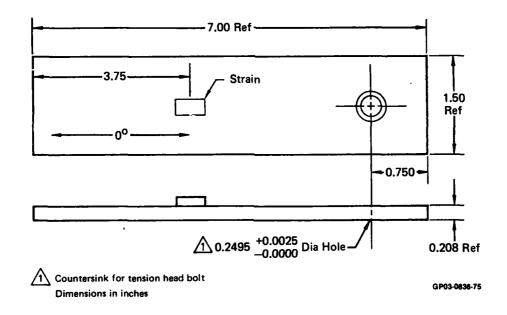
Test Specimen - Loaded Hole, Static Test (LHST)
